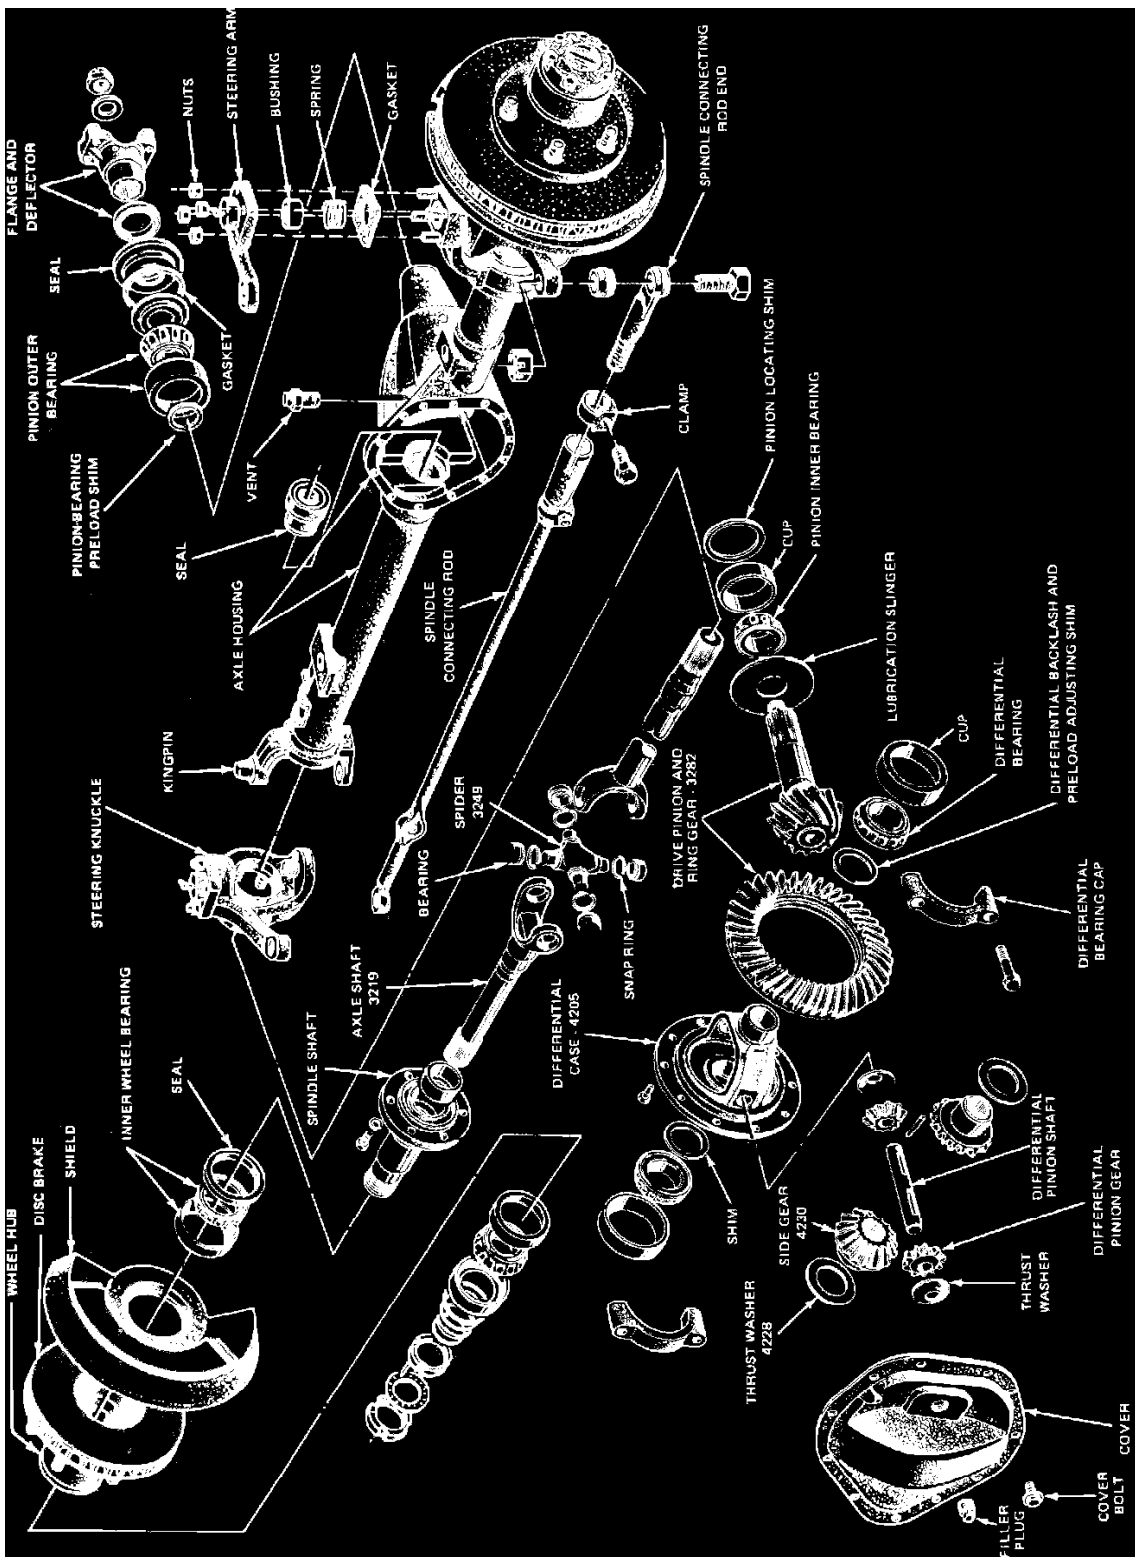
Disassembled view of Dana/Spicer model 60 front drive axle
